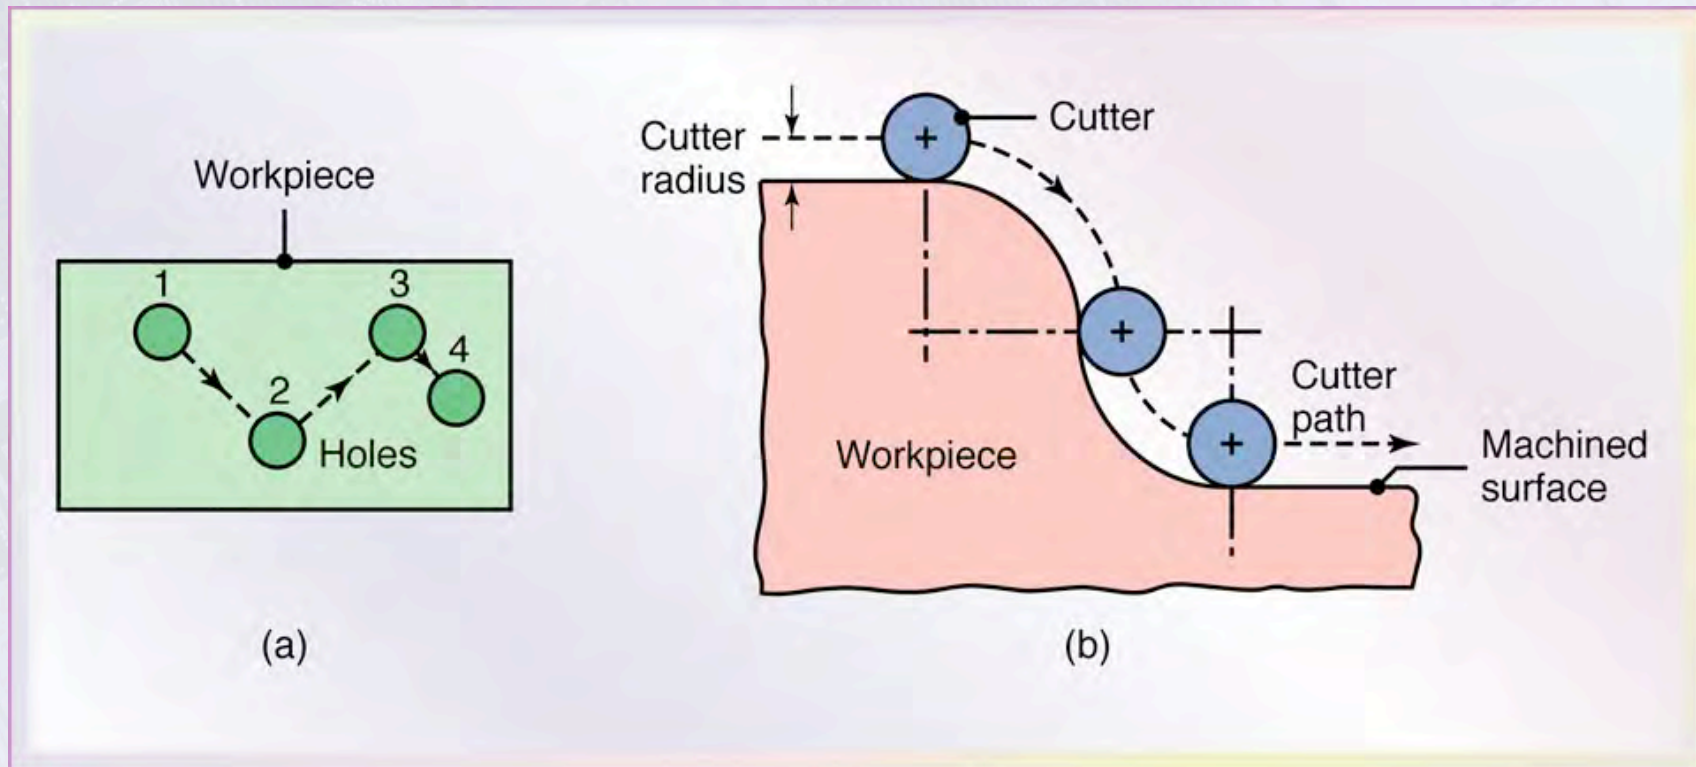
Movement of tools in numerical-control machining. (a) Point-to-point, in which the drill bit drills a hole at position 1, is retracted and moved to position 2 and so on. (b) Continuous path by a milling cutter. Note that the cutter path is compensated for by the cutter radius. This path also can be compensated for cutter wear.
